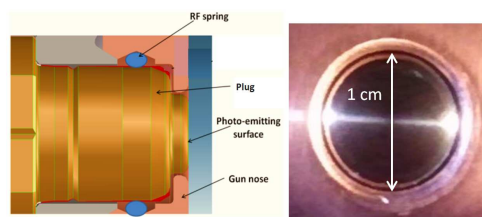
Left: CAD side view of the molybdenum cathode plug inserted in the gun nose. Right: picture showing the plug tip inside the gun viewed from the beam exit pipe.
